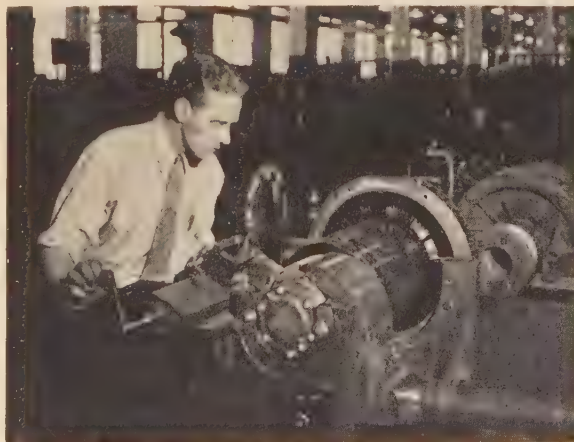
Method of attaching fixture to grind commutator with armature running in its own bearings
